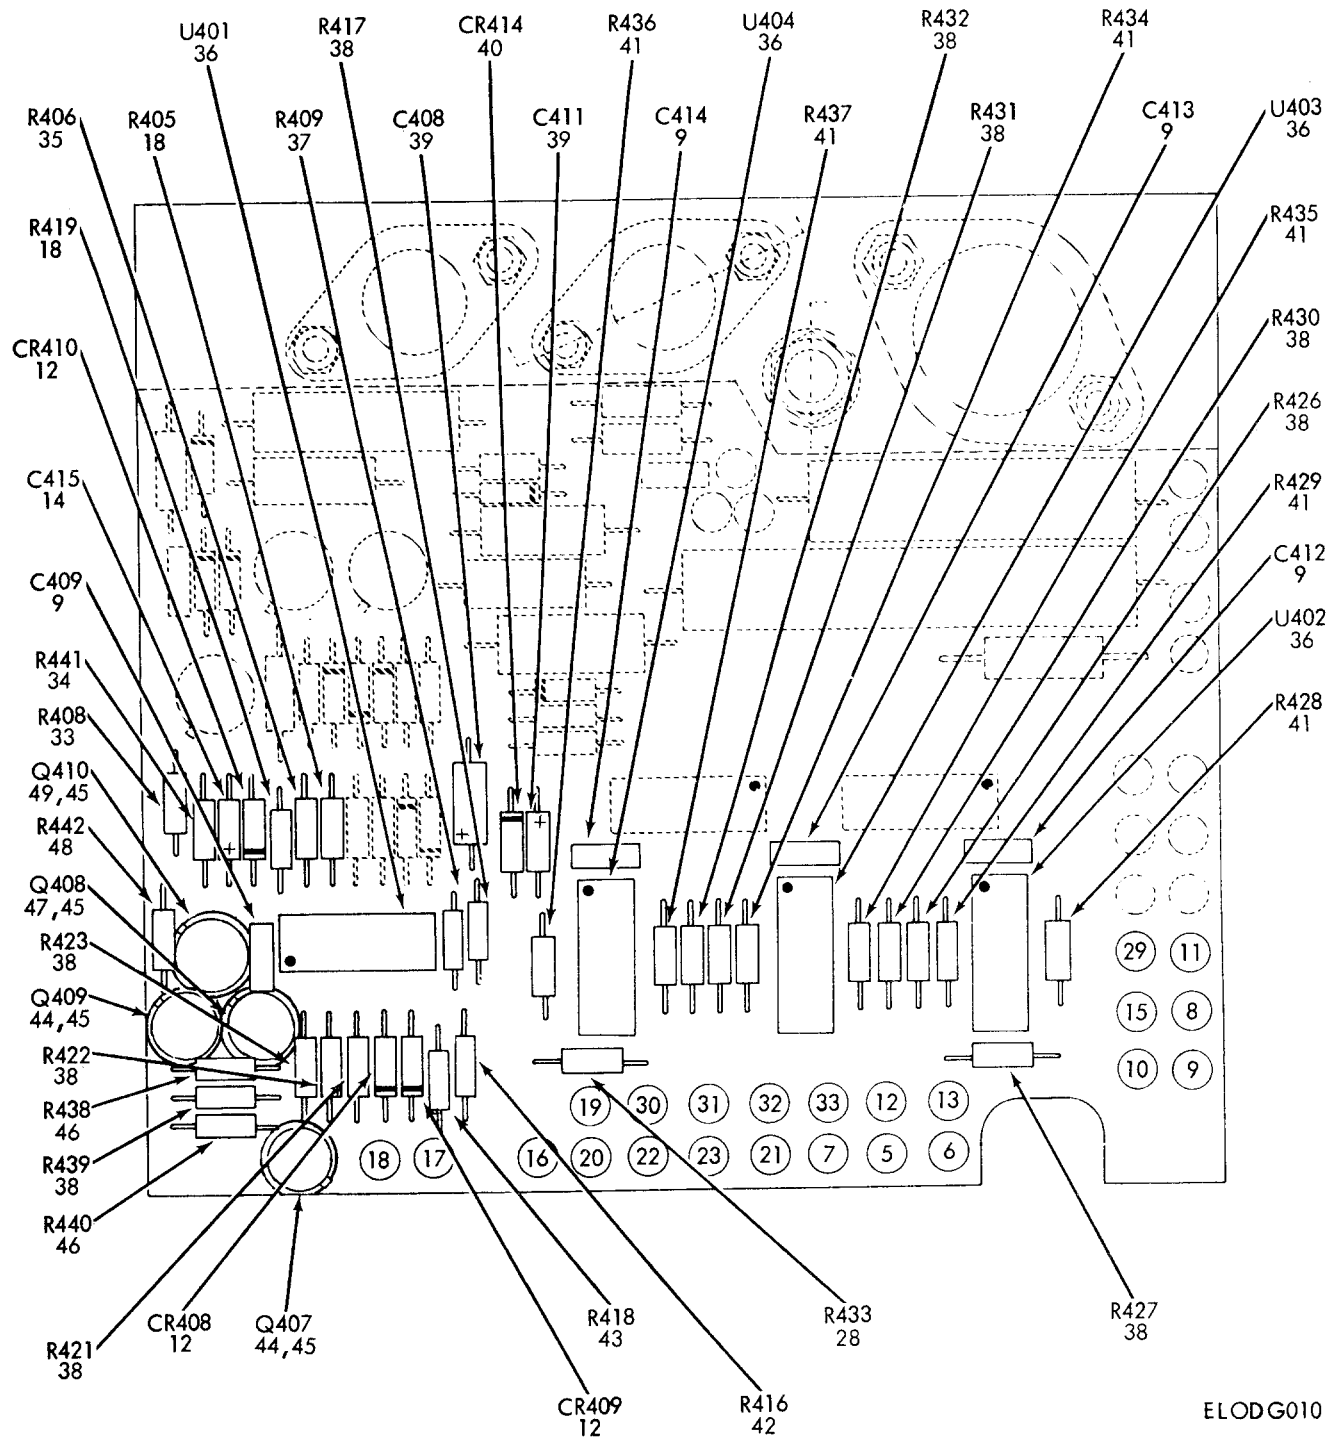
② Printed circuit board assembly, dc voltage regulator and data drive (sheet 2 of 2).
